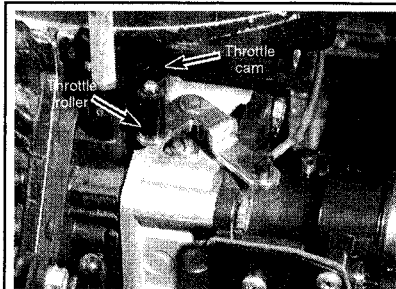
then make sure the throttle cam and cam roller are not touching
